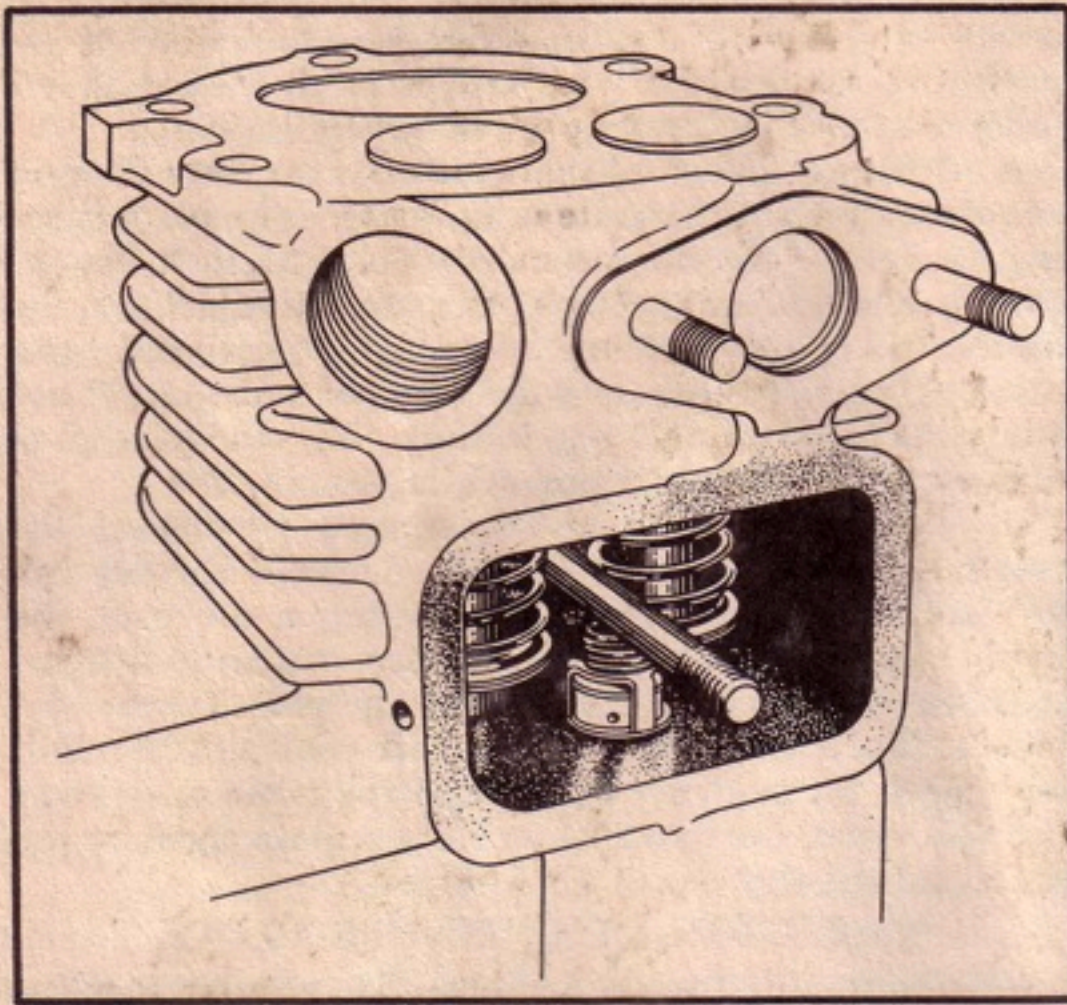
Oil Breather Assembly in Typical Horizontal Shaft Engine
